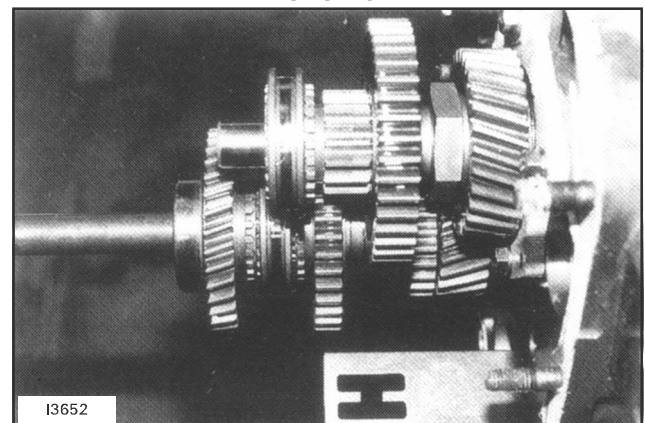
A-51: Pull out the PTO shaft, 1, 4WD shaft, 2, and gear, 3.
